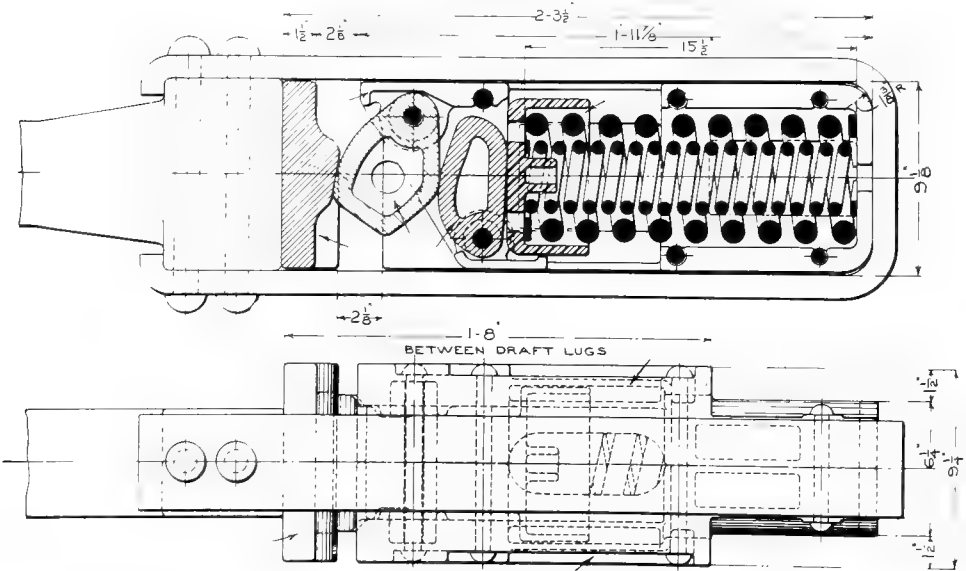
General Arrangement of McCord Draft Gear, Type D. McCord & Company.
